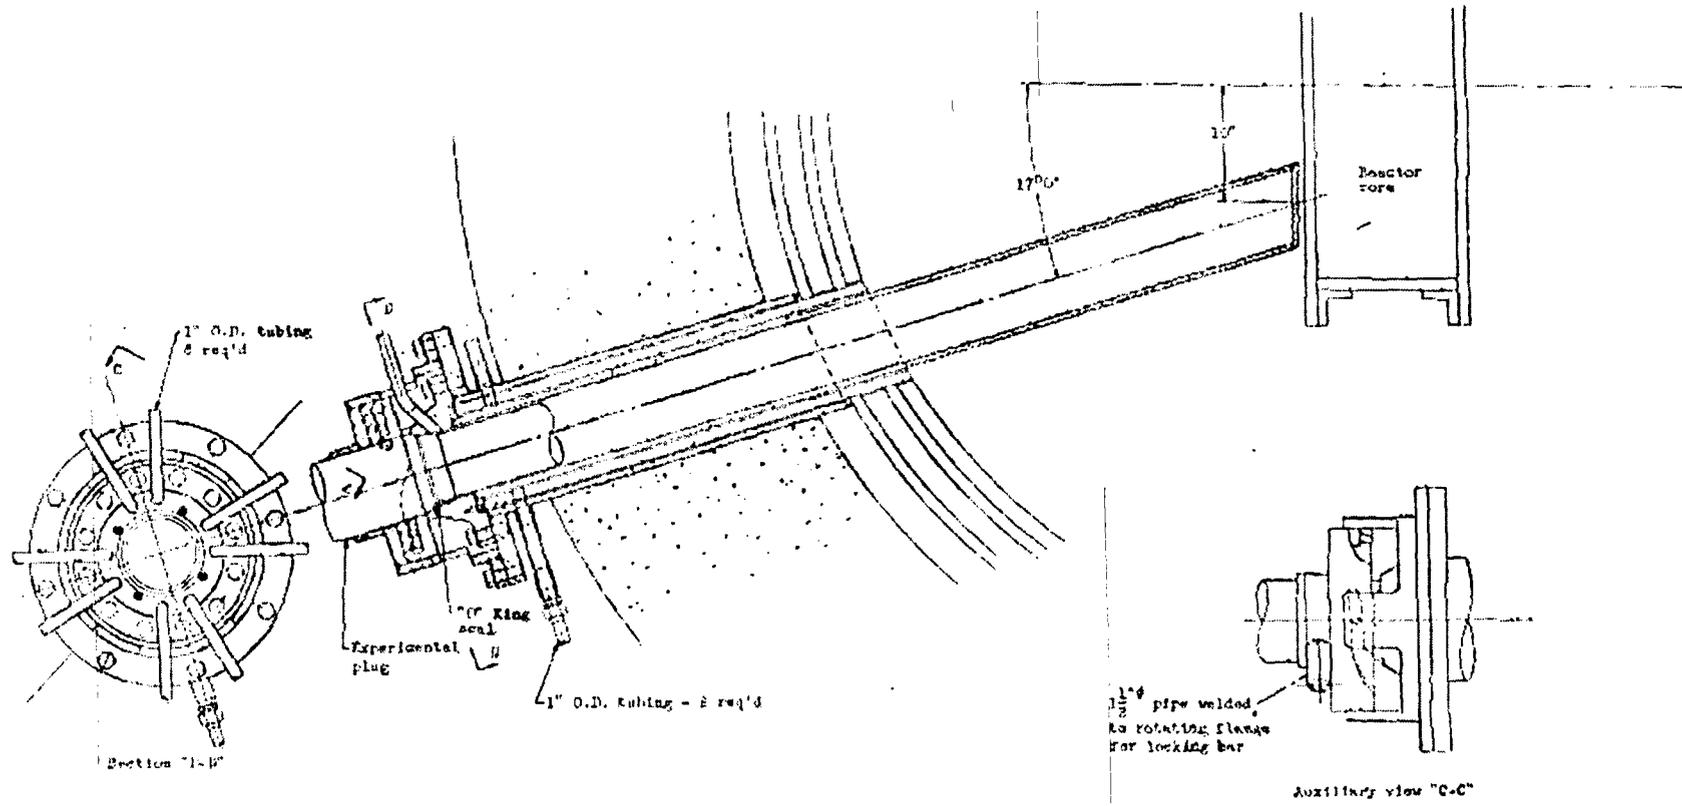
Cutaway perspective drawing of reactor tank assembly.
